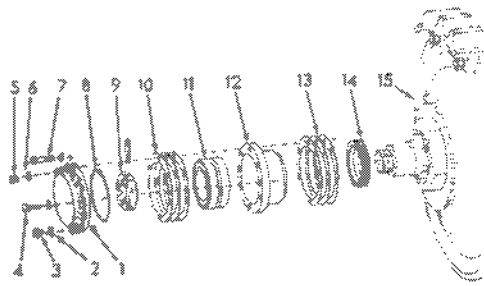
SPROCKET SHAFT OUTBOARD T-75929
